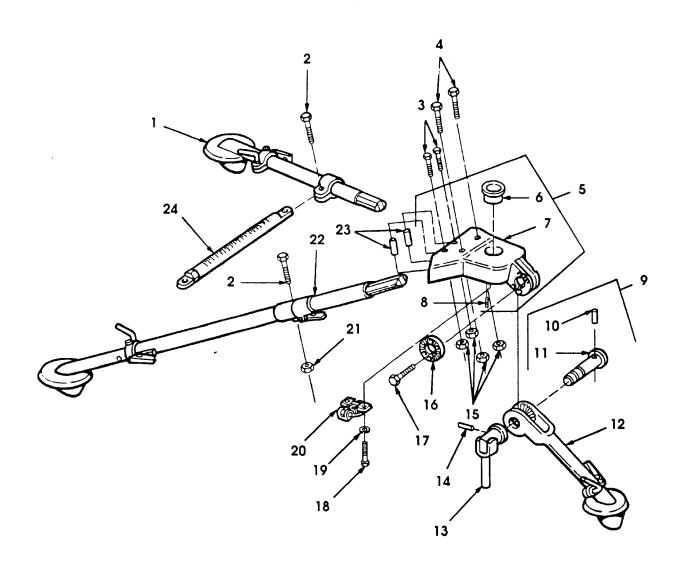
Mount, Tripod, Machine Gun, M3 8403398; Head, Bearing Assembly 8448211; and Bolt, Machine 6108395.
